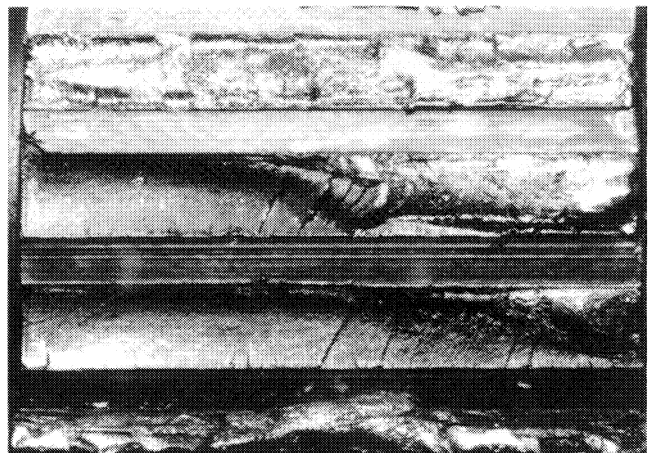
180° Away From the Teeth Seen Above, Three Teeth Are Seen to be Broken Off at the Root Diameter. The Fracture Surfaces of the Lower Two Exhibit Multinucleated, High Cycle Fatigue, With Origins Along the Tooth Flank/Root Radii, on the Driver Seals.
